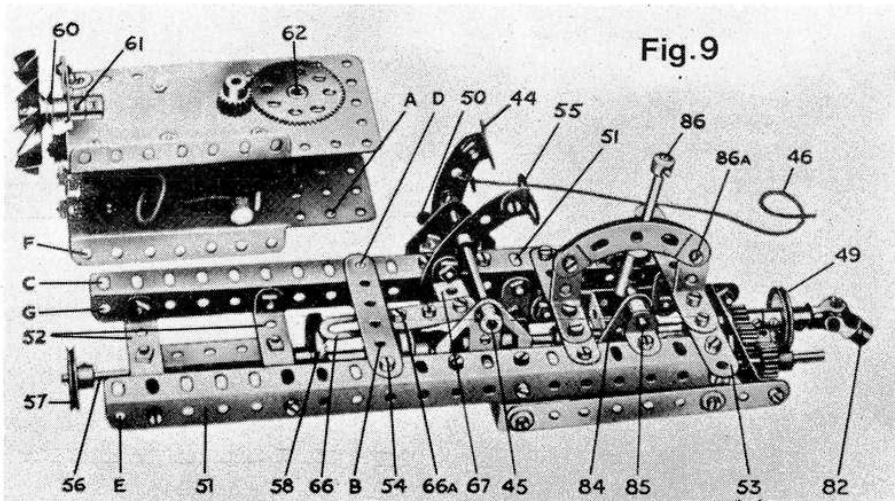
, a general view of the power unit, with the motor detached. An E15R Motor can be used in place of the obsolete motor illustrated.
